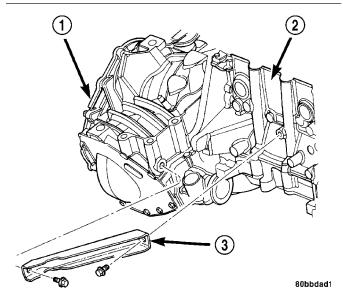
Right Lateral Bending Brace Removal/ Installation—Typical
